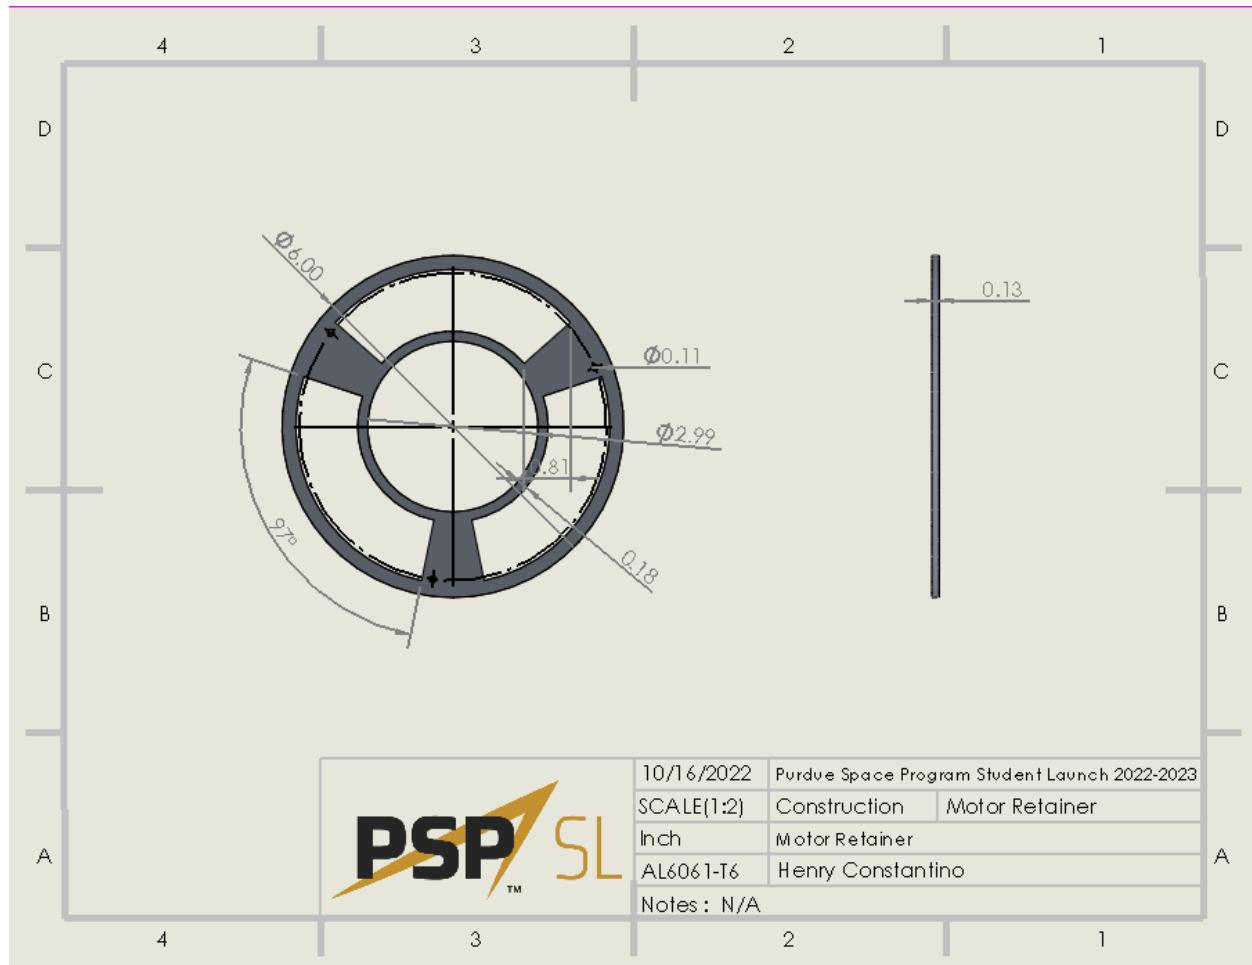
Technical Drawing for Motor Retainer Plate
